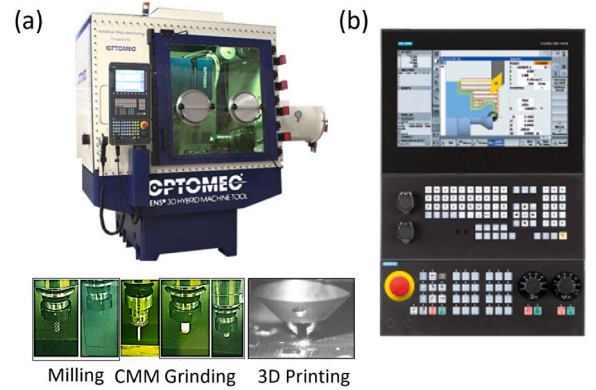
Hybrid Machine Tool (a) OPTOMECS MTS 500 Hybrid Machine Tool with available tools (b) Sinumerik 828D Machine Tool Controller.
